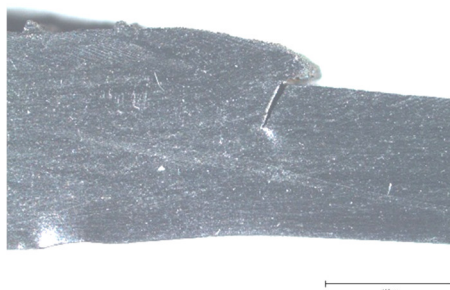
Fatigue crack initiated at the notch at the overlay boundary.
